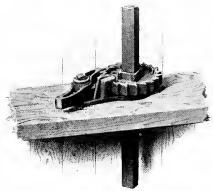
Carmer Ratchet Wheel, Pawl and Plate Applied to Square Brake Shaft.
